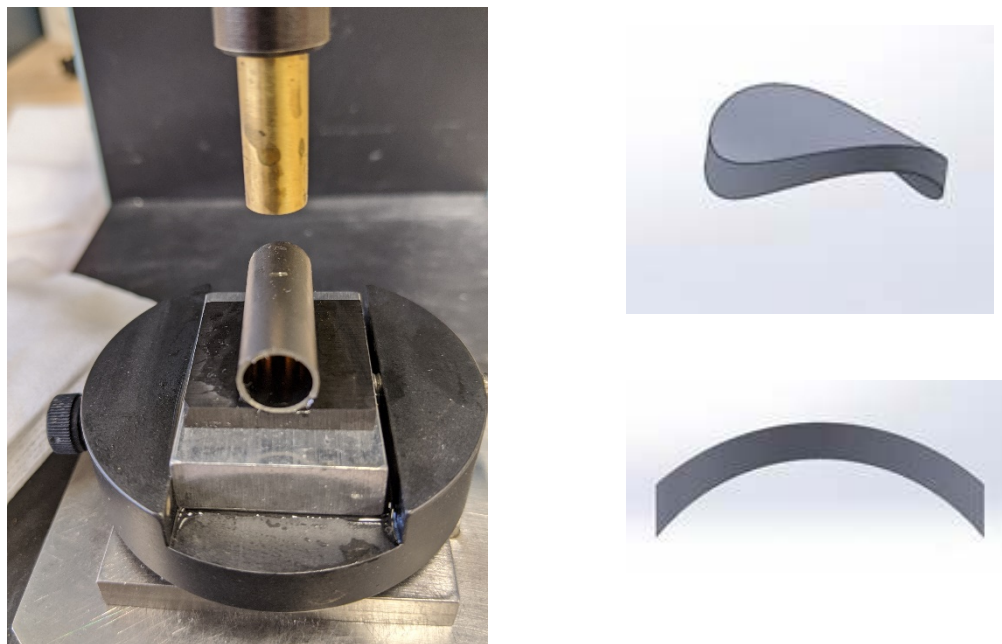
Core-drilled unirradiated oxidized Zr-2 test specimen
